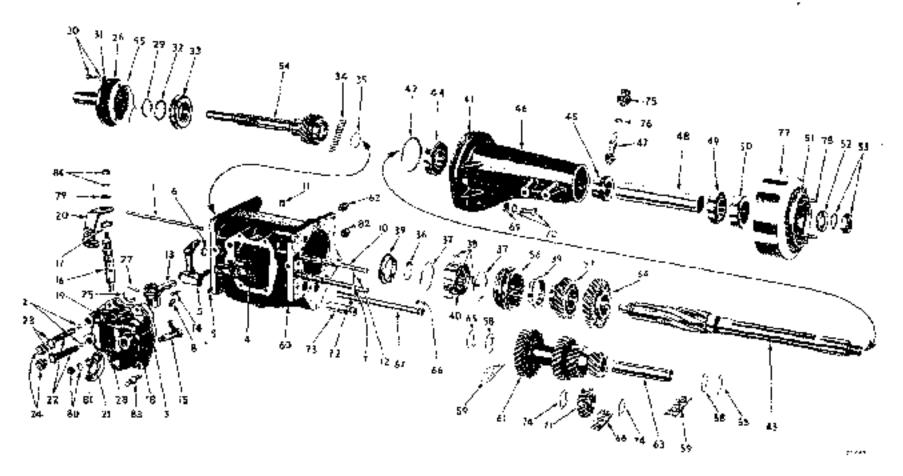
Transmission (Disassembled View) (1942 Model, Typical of 1940-4) Madeis;
